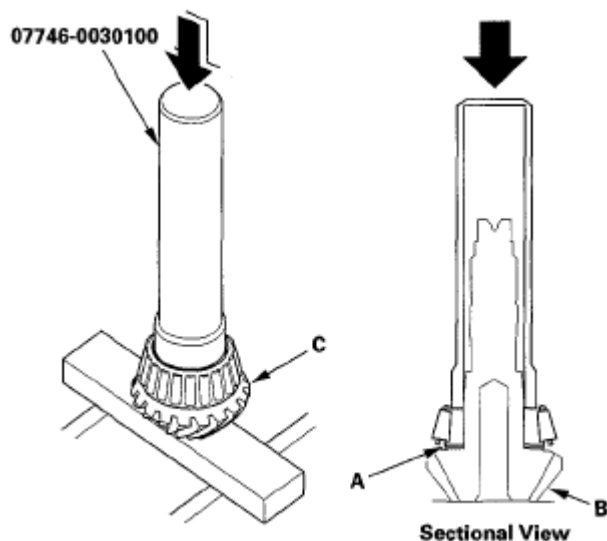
Pressing Tapered Roller Bearing Onto Shaft
